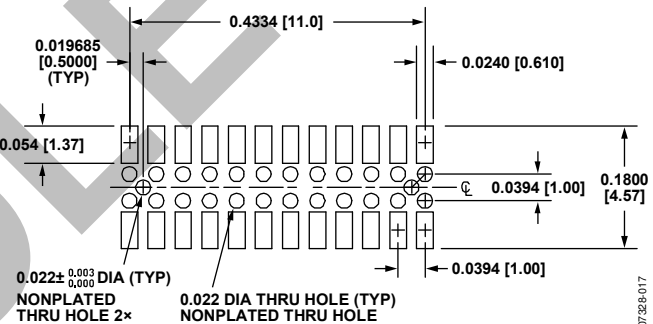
Mating Socket Recommended Pad Layout with Dimensions Shown in Inches and (Millimeters)
